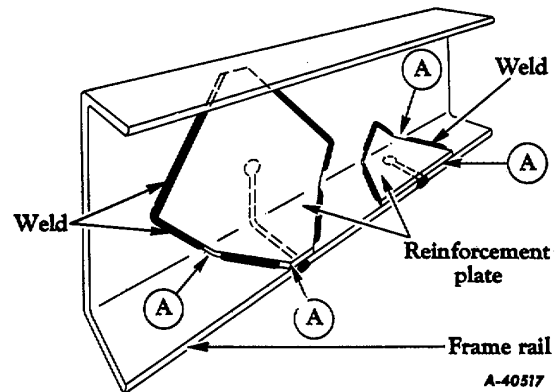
Suggested Types of Reinforcing Plates and Method of Attaching to Frame Rail.
